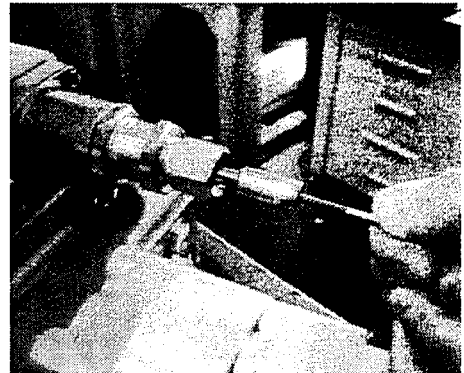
Remove valve cover (312), and remove check valve sub-assy and orifice thread (508).
